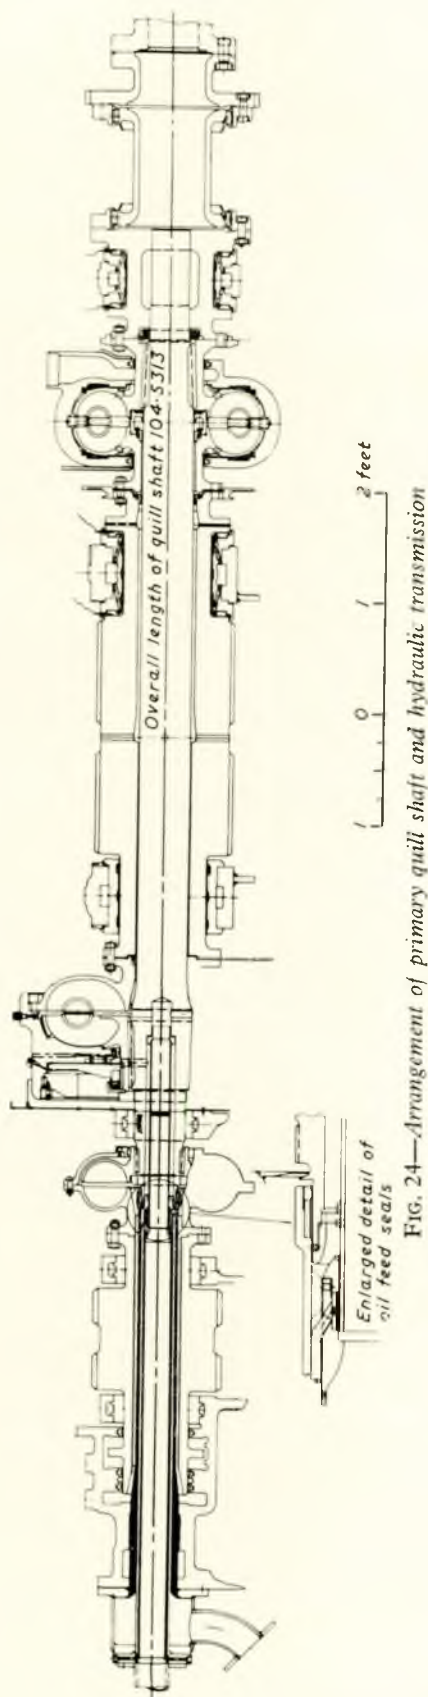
Arrangement of primary quill shaft and hydraulic transmission
